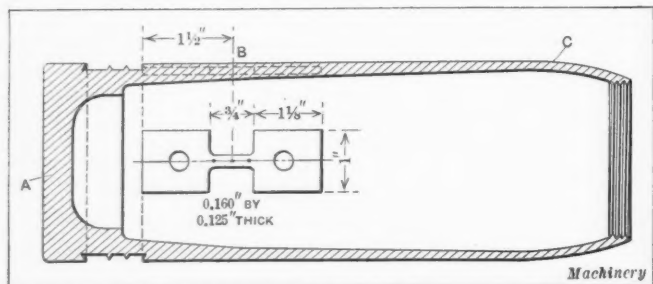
Cross-sectional View of Shrapnel Shell showing Points A, B and C where Tests are made, and one of the Tensile Test Samples
